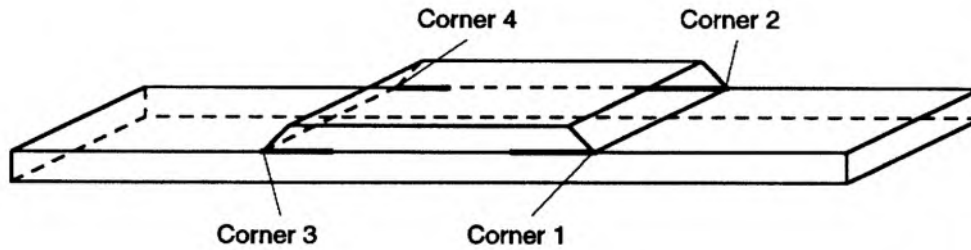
Skin-stringer bond line specimen with crack locations [44]
